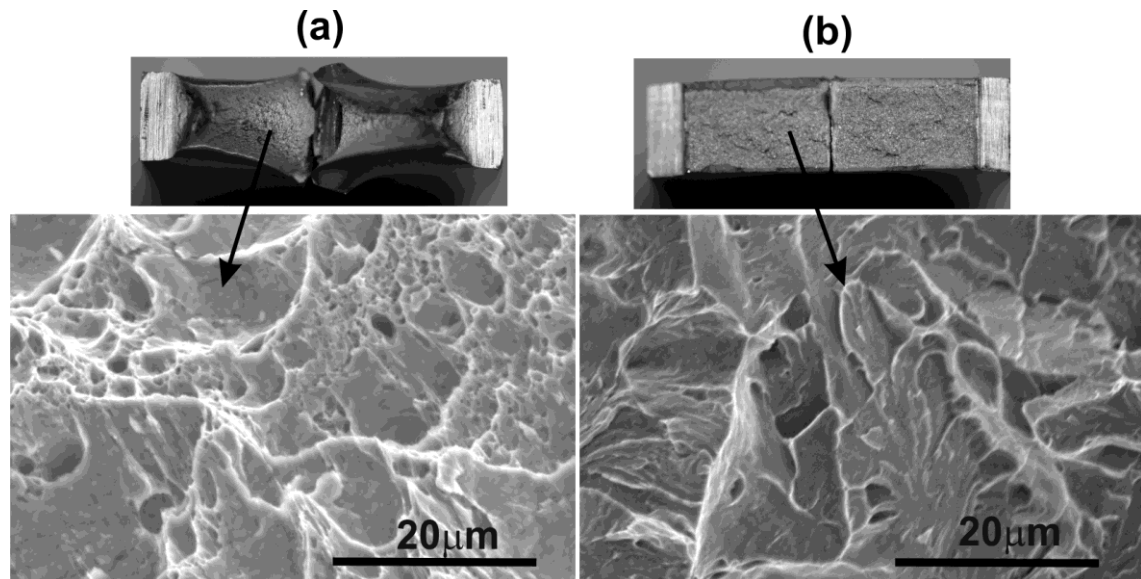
Scanning electron micrographs of the fracture surface of impact tested samples. (a) Ductile mode of fracture in stir zone at 200 rpm. (b) Cleavage mode of fracture at 700 rpm. Figure also shows macroscopic images of fracture surfaces of two halves arranged together after fracture.
